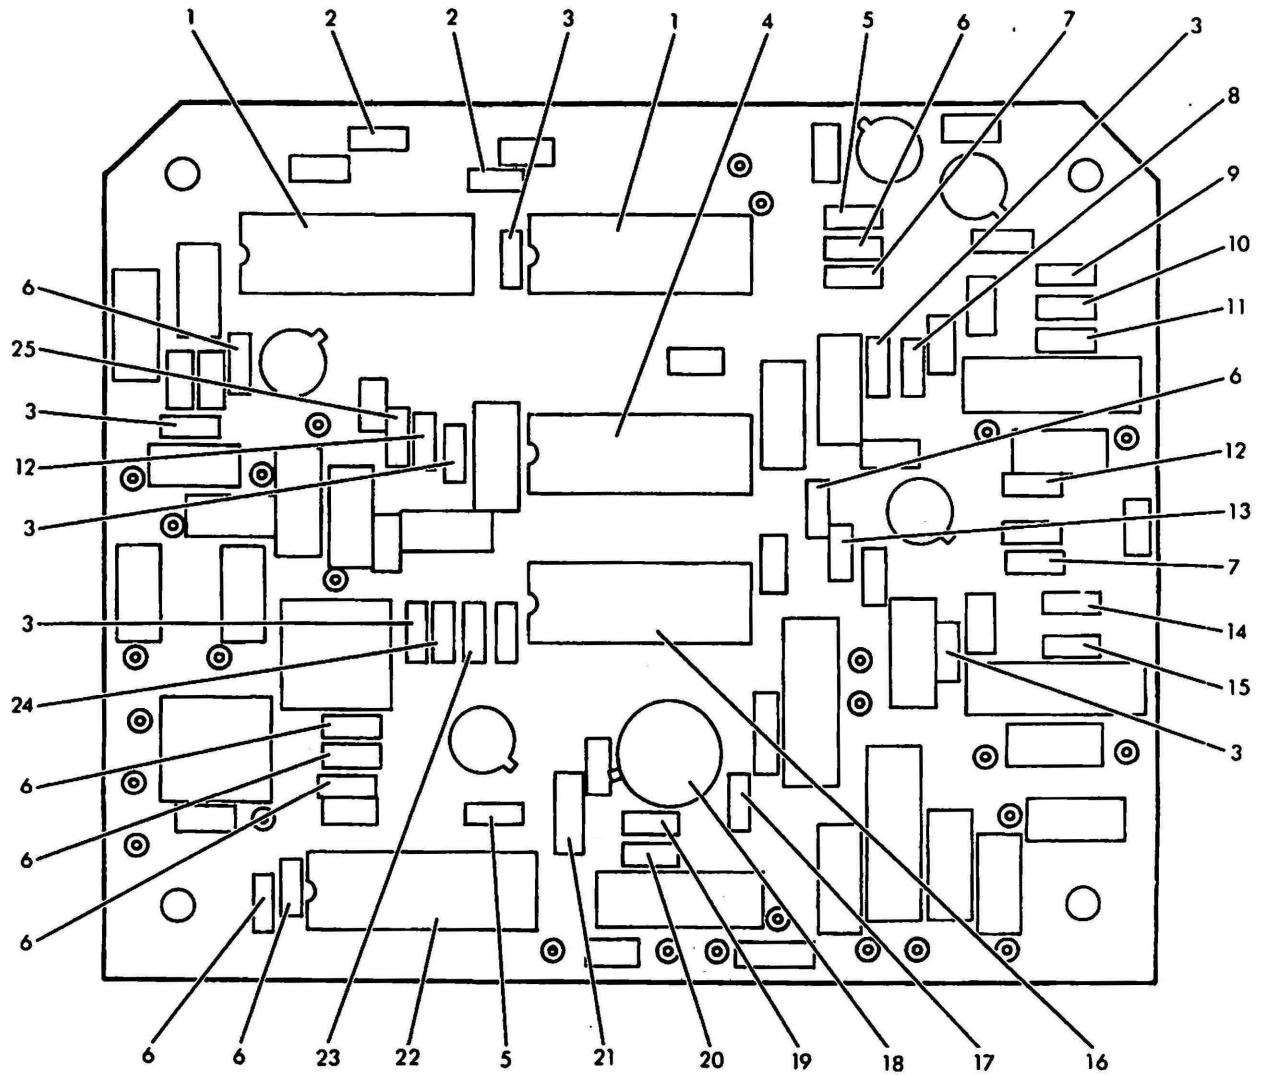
Loop Integrator and Regulator Board Assembly (Sheet 2 of 2)
